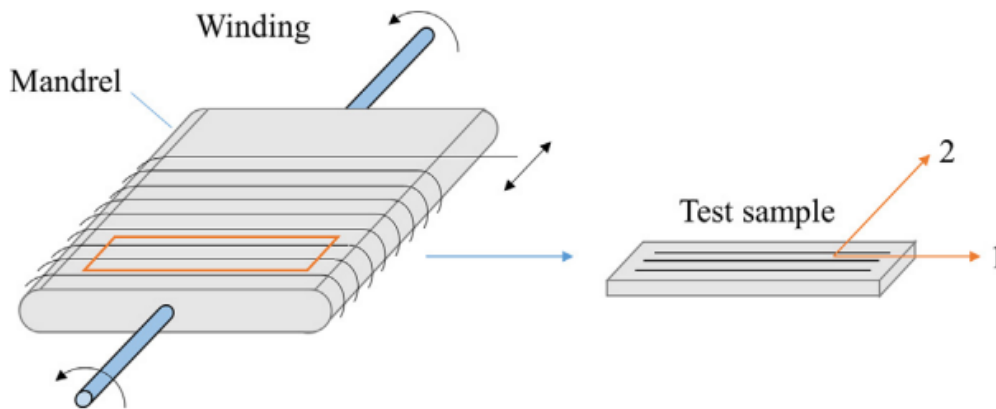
Special mandrel design for tensile test coupon manufacturing (39)
